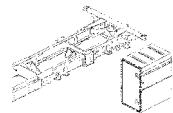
Attachment of frame to the cross girder of the rear connecting part
